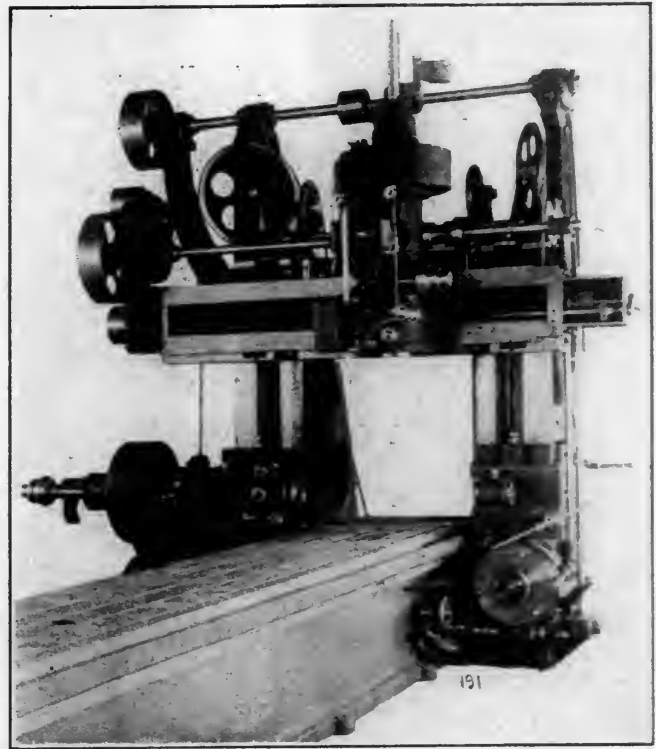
THE 42-INCH COMBINED HORIZONTAL AND VERTICAL SPINDLE MILLING MACHINE, MOTOR-DRIVEN.—INGERSOLL MILLING MACHINE CO.
